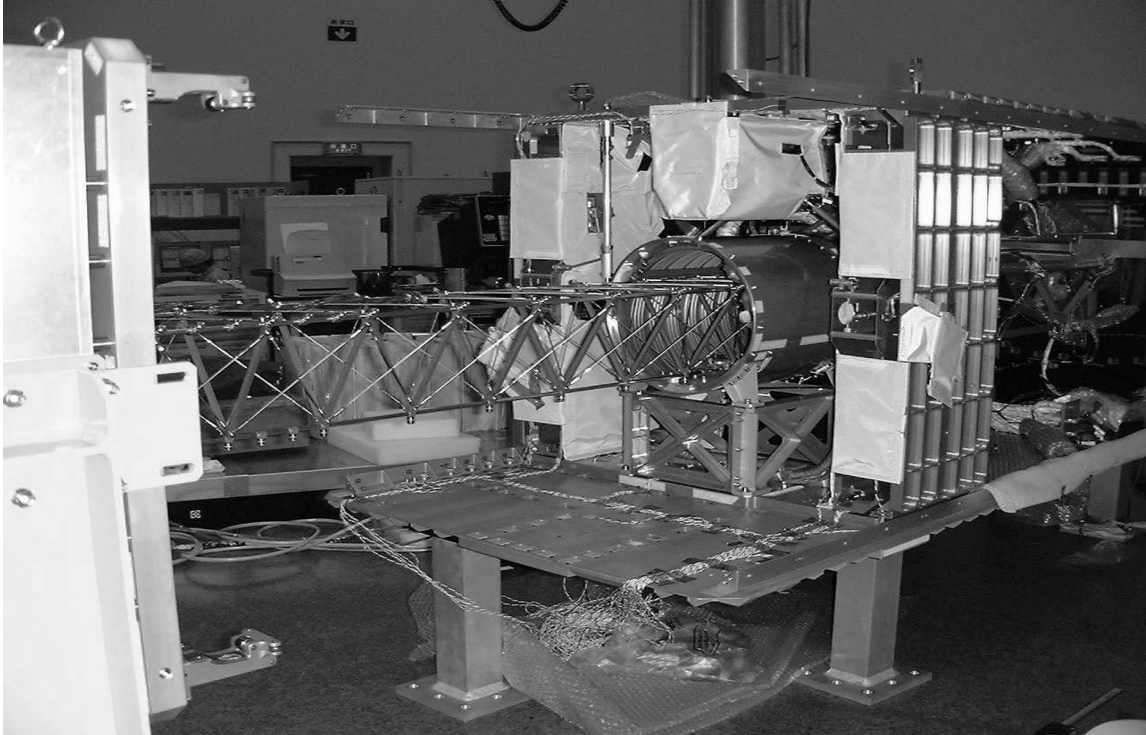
Final Assembly and Testing of Extension Mechanism Assembly of SEDA-AP
